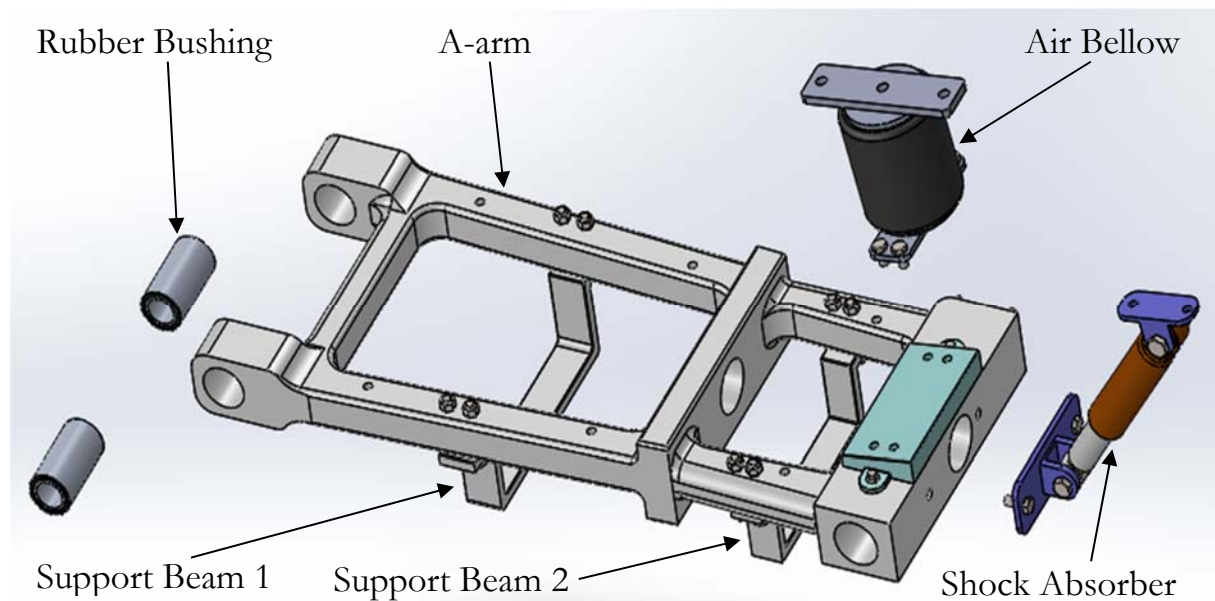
EXPLODED VIEW OF WHEEL SUSPENSION
